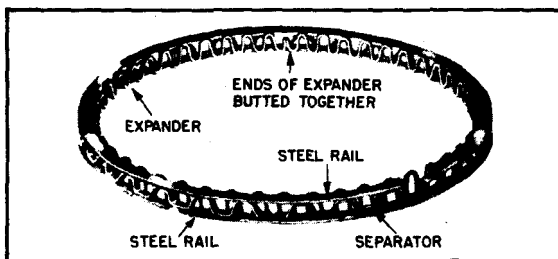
"M" Type or Four-Piece, Ventilated, Chrome Plated Steel Rail Style Oil Control Wiper Ring
